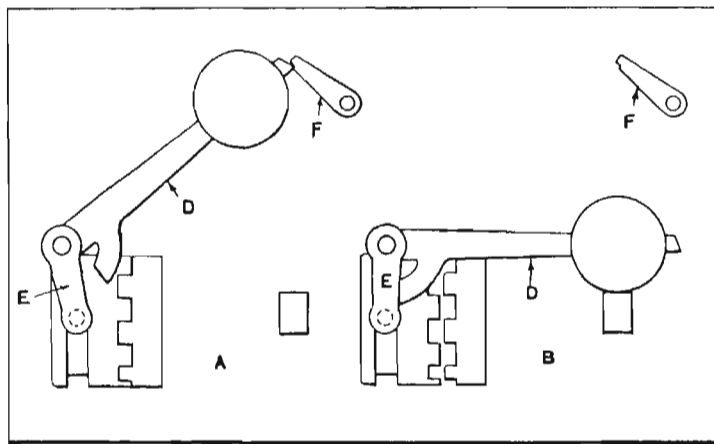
Releasing Mechanism in which a Falling Weight Disengages a Toothed Clutch
